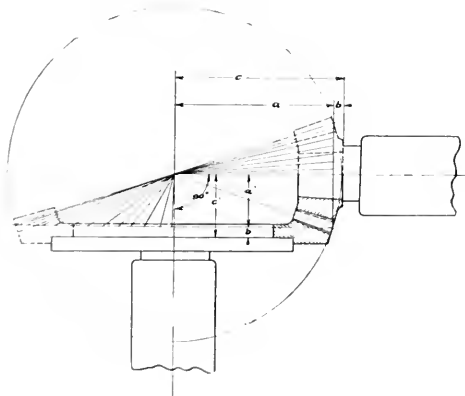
FIXED POSITION OF TESTING-MACHINE HEADS
